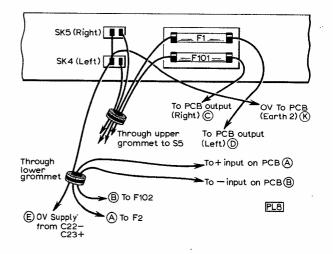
Details of sockets SK4, SK5 and loudspeaker fuse mounting.
